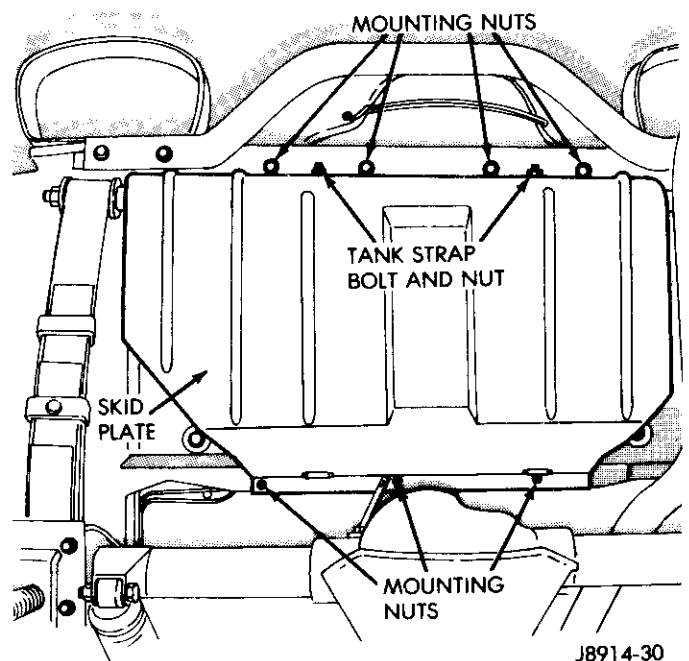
Fuel Tank Remove/Install—YJ Vehicles
